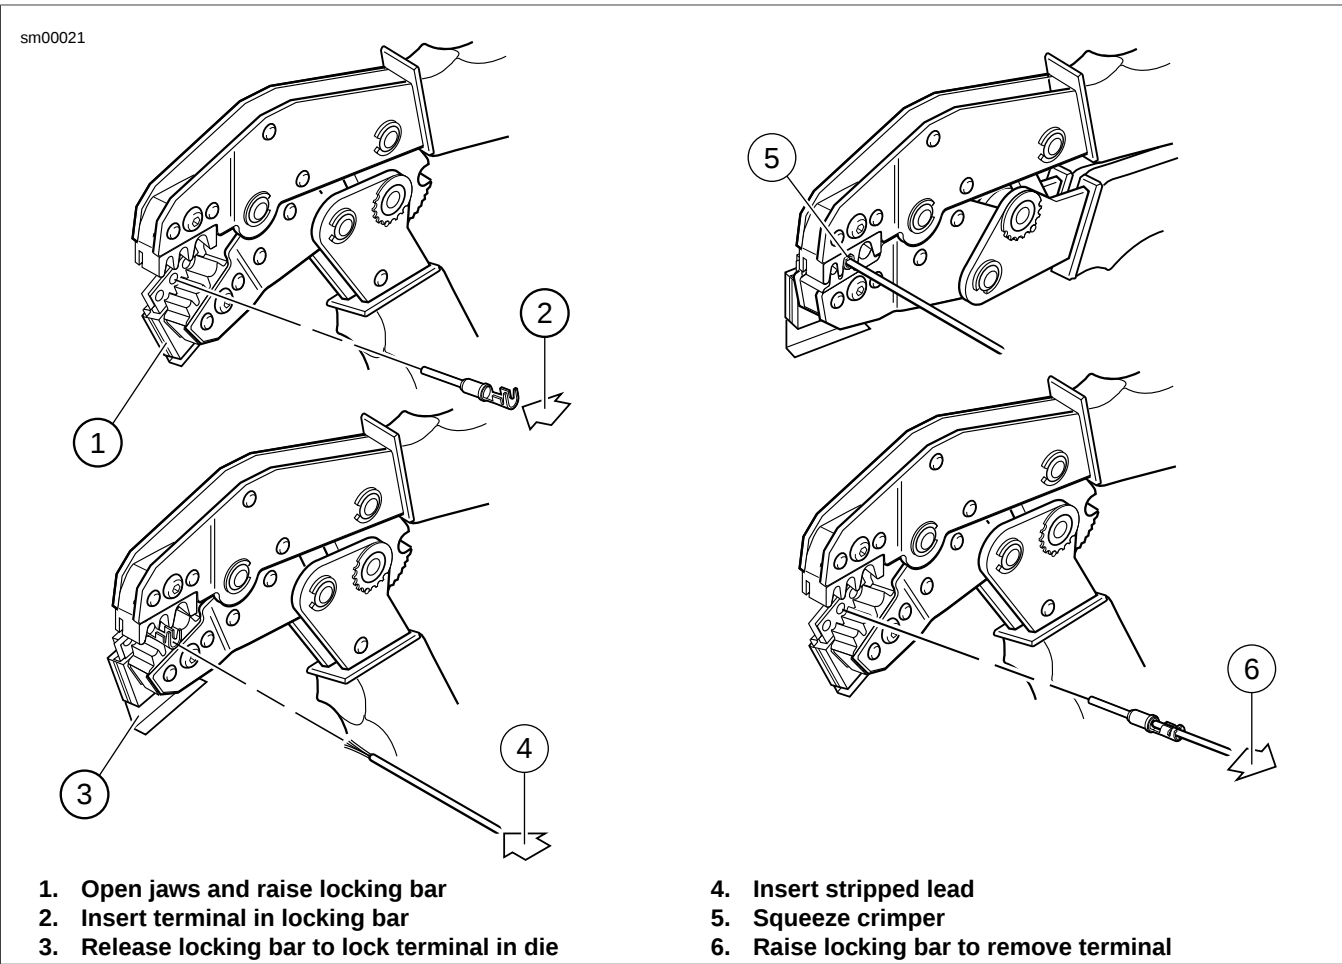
Crimping a Deutsch DT Sealed Terminal
